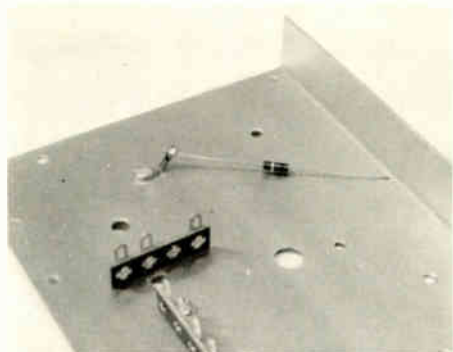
Resistor R_1 soldered to terminal 1.
